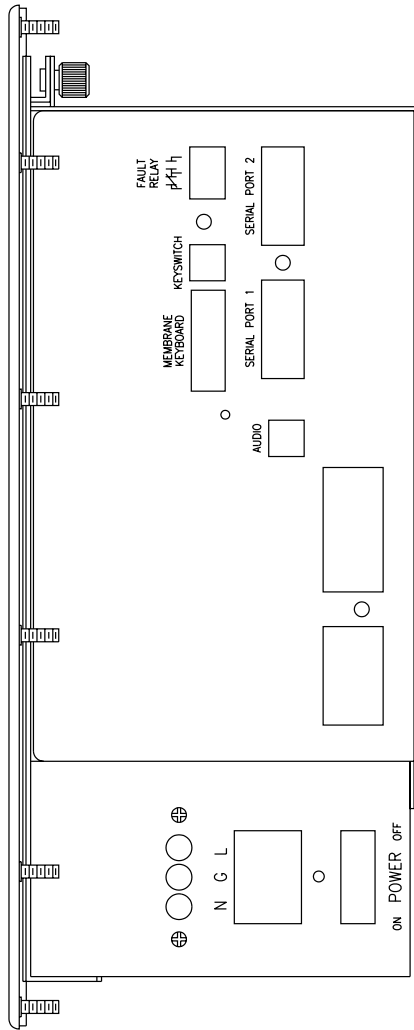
PanelMate Power Series 3000 Keypad Unit (Models 3600, 3700, and 3900) Side View
